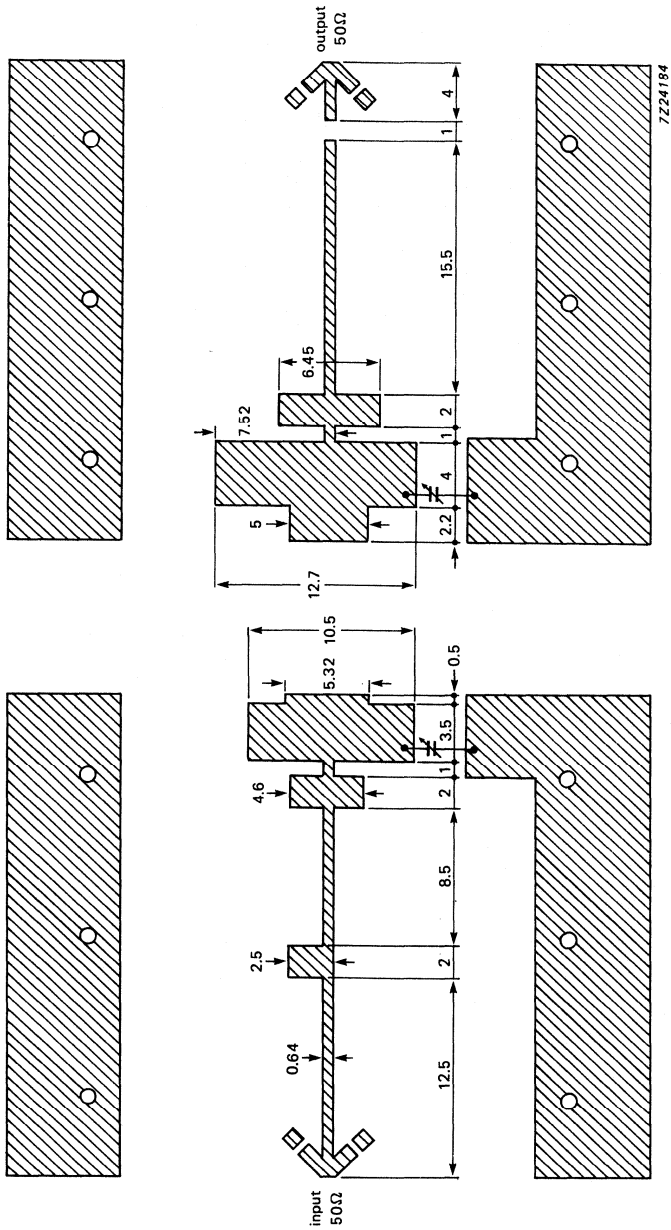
Narrowband test circuit for 1.64 GHz; class-C; pulsed application; Epsilam printed circuit board; thickness 0.635 mm; $\epsilon_r = 10$; dimensions in mm.
